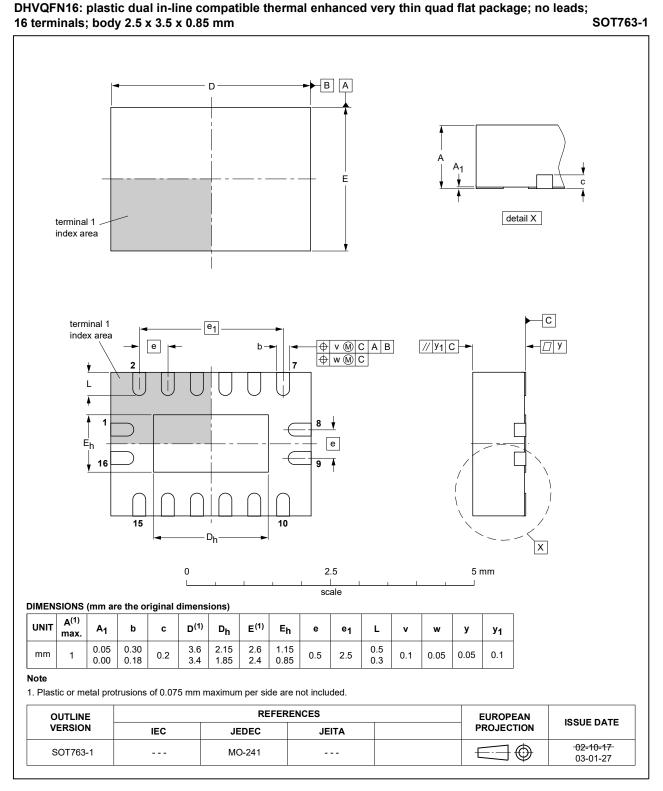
Package outline SOT763-1 (DHVQFN16)
